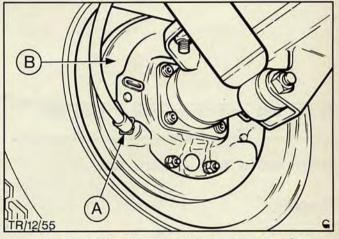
Remove handbrake cable to carrier plate retaining clip.
